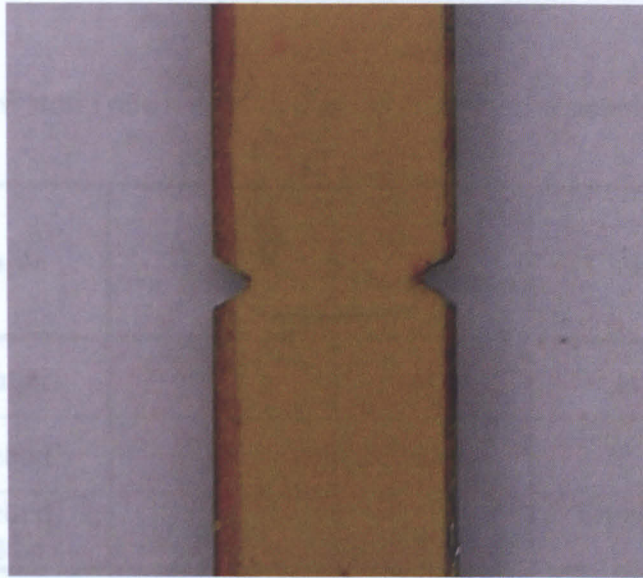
Cracked, soaked notched specimen of coating B showing a single crack
